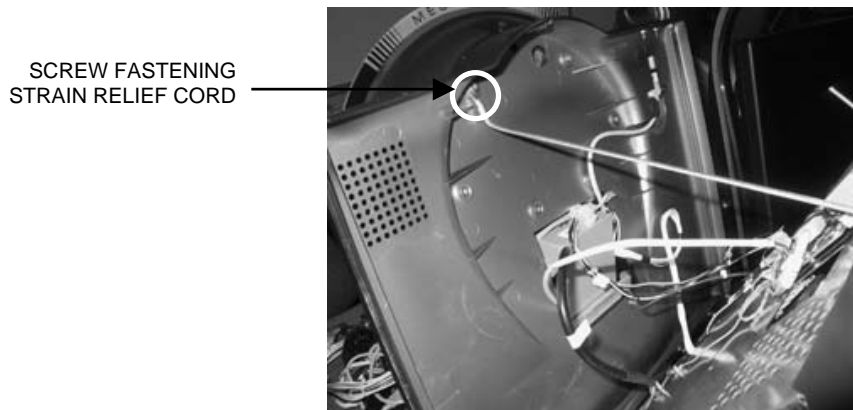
HALF-WAY OPEN MONITOR ASSEMBLY
